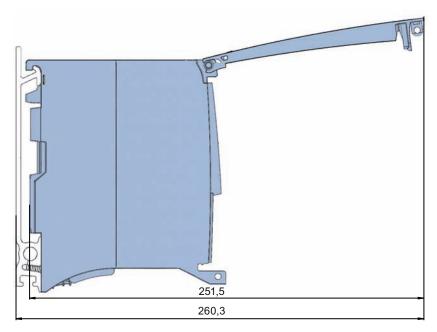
Dimensional drawing of the CM PtP RS232 HF communication module with open front panel
